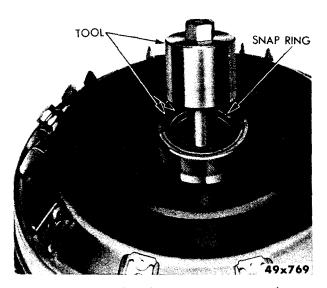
Tool and Snap Ring Positioned for Installing (Tool C-884)
